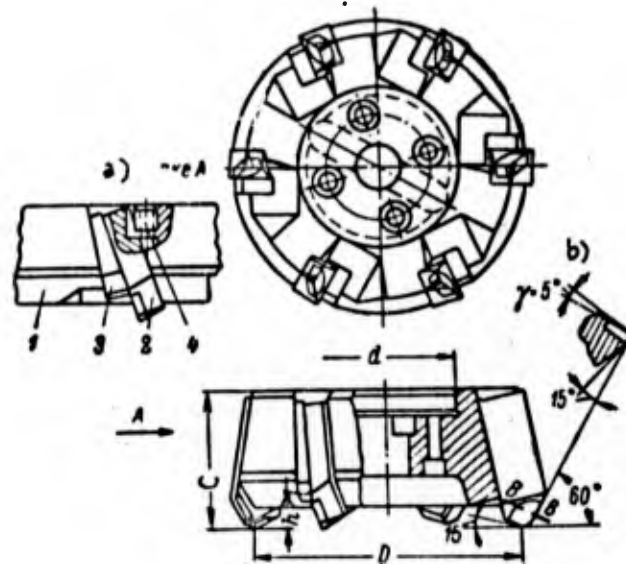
End Milling Cutter, Carbide-Tipped, With Inserted Teeth,
